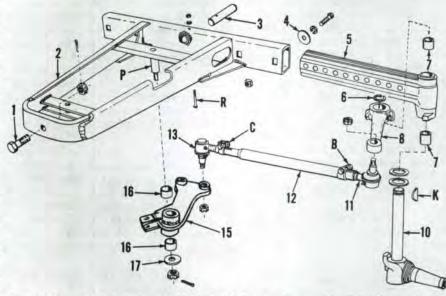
Exploded view of Model D-21 front axle assembly. Bolt (R) retains front pivot pin (3). To adjust front wheel toe-in, remove bolt (B), loosen clamp (C) and turn tie rod tube (12) in or out as required.
